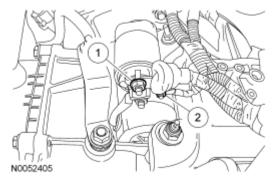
Identifying Wiring Harness Retainer From Starter Motor Stud Bolt Courtesy of FORD MOTOR CO.
